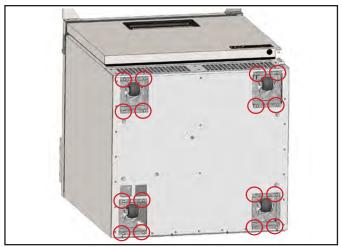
Locate castor box. Back out the four screws anchoring the box.
